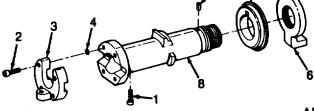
Disassembly/assembly of adapter assembly PN 11578780 for M109 series and M107/M110
